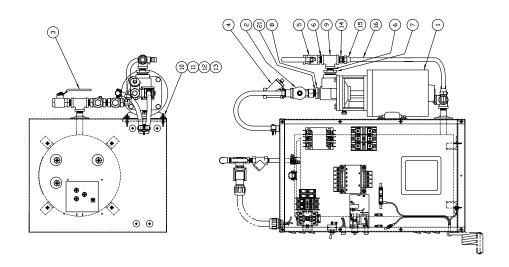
73529 (rev C) Water Pump Assembly Kit Single Phase, Hoffman Steam Generator
